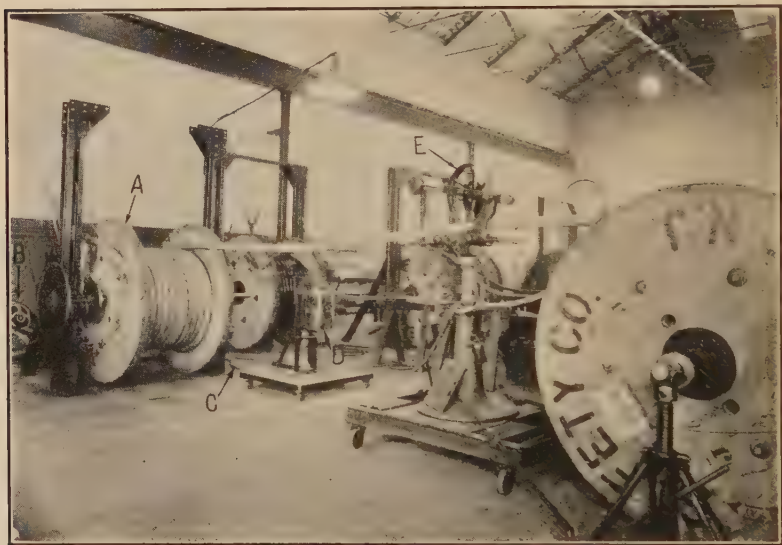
Arrangement of equipment for inspecting and measuring cable reel on left (A) is turned by chain driven gear motor speed being controlled through flexible cable, (C) from controller, (D) which is mounted on a movable truck. Operator stands with hand on controller as cable is being reeled. Measurements made by standard equipment. (E) mounted on truck.
